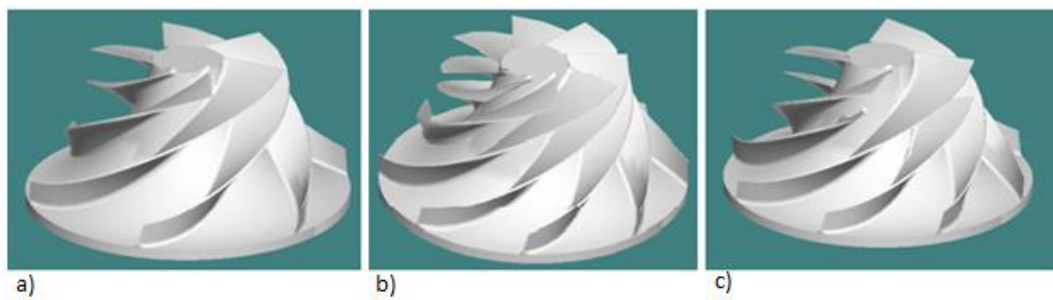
Blading arrangements for a) 6, b) 8 and c) 4-8 bladed impellers.
